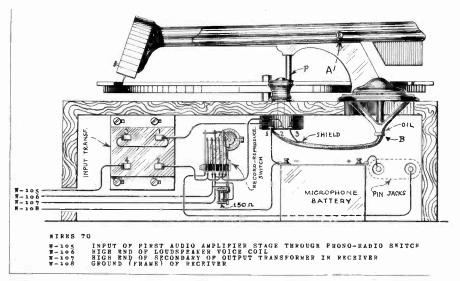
COMPLETED MOTOR-BOARD ASSEMBLY WITH PICK-UP IN PLACE ON A RECORD
